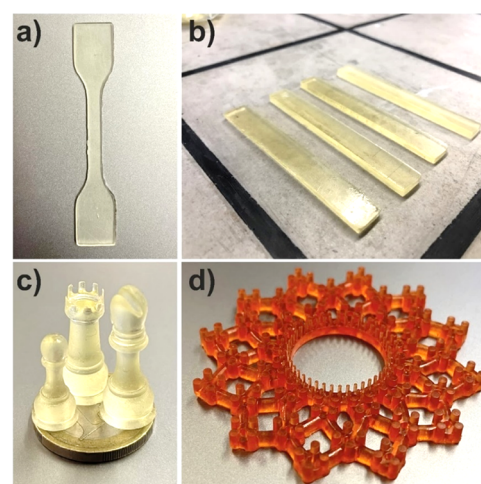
Pictures of 3D-printed materials. (a) Tensile and (b) DMA test specimen, (c) small chess pieces, and (d) complex abstract structure with small details printed after the addition of 0.05 wt.% purpurin to the resin. Chess pieces were placed on top of a 1 € coin to highlight their small size. All displayed prints were performed using the r1a resin to show the high resolution that can be obtained with the proposed poly(ester-thioether)s. Specimens printed with the other resins are not displayed, but no appreciable differences in the printing resolution were observed when the poly(ester-thioether) was changed.
